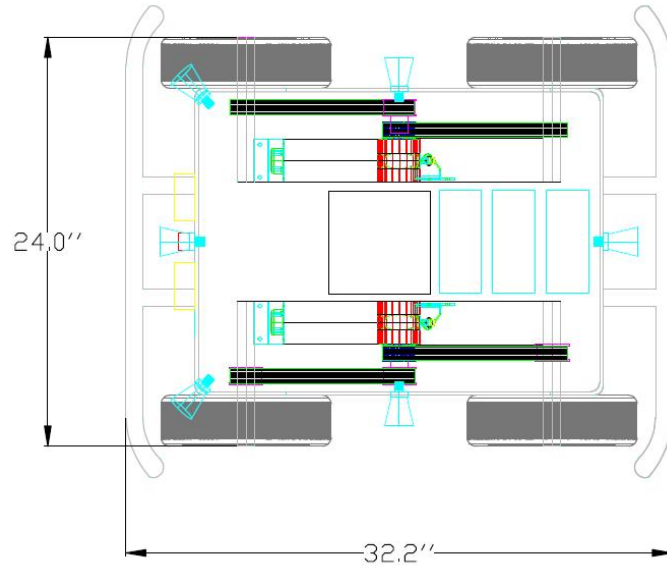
IMR Wheeled Robot – V1, Top View with outside dimensions
